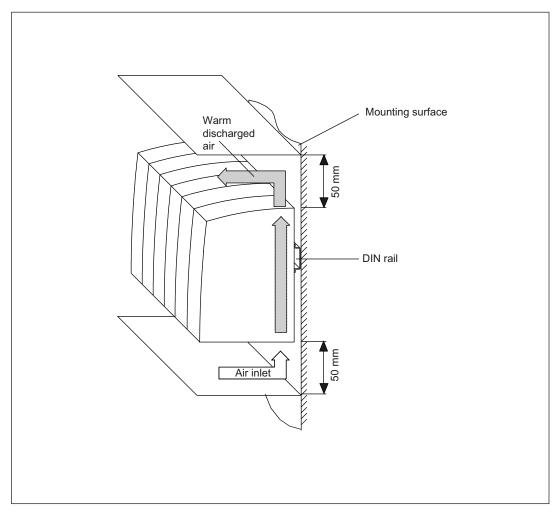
Cooling clearances, rail-mounted modules (e.g. VSM, SMC, TM, DMC)
